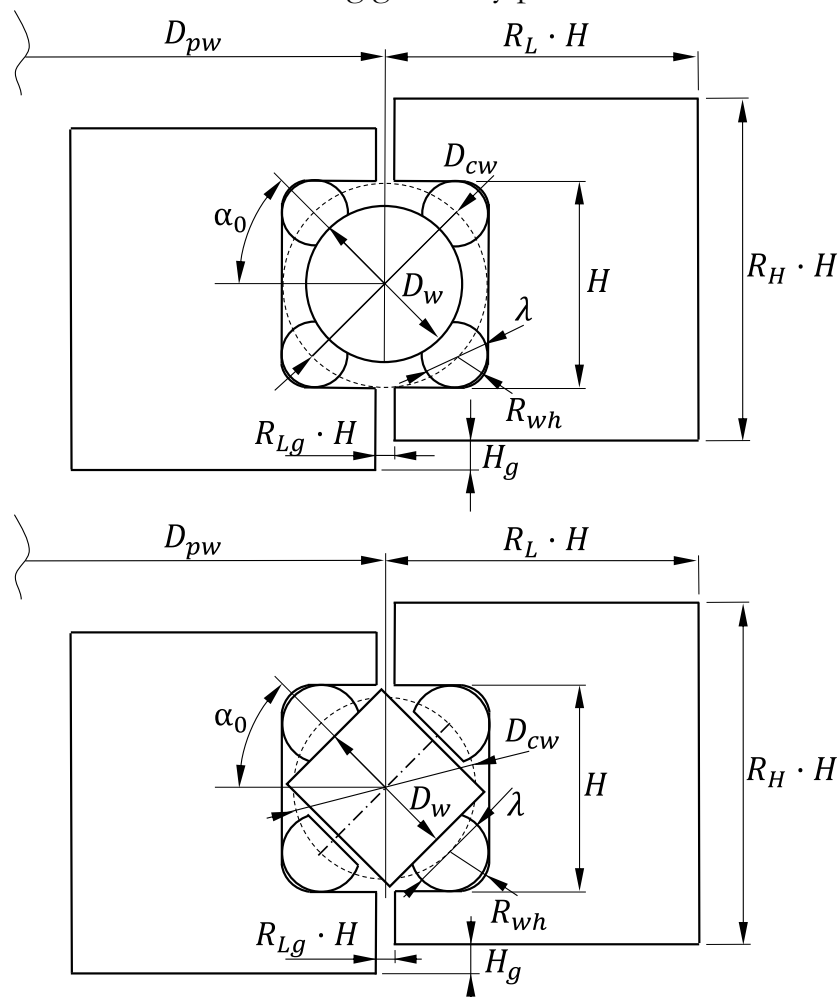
Four-point contact and crossed roller wire-race bearing cross-section.
